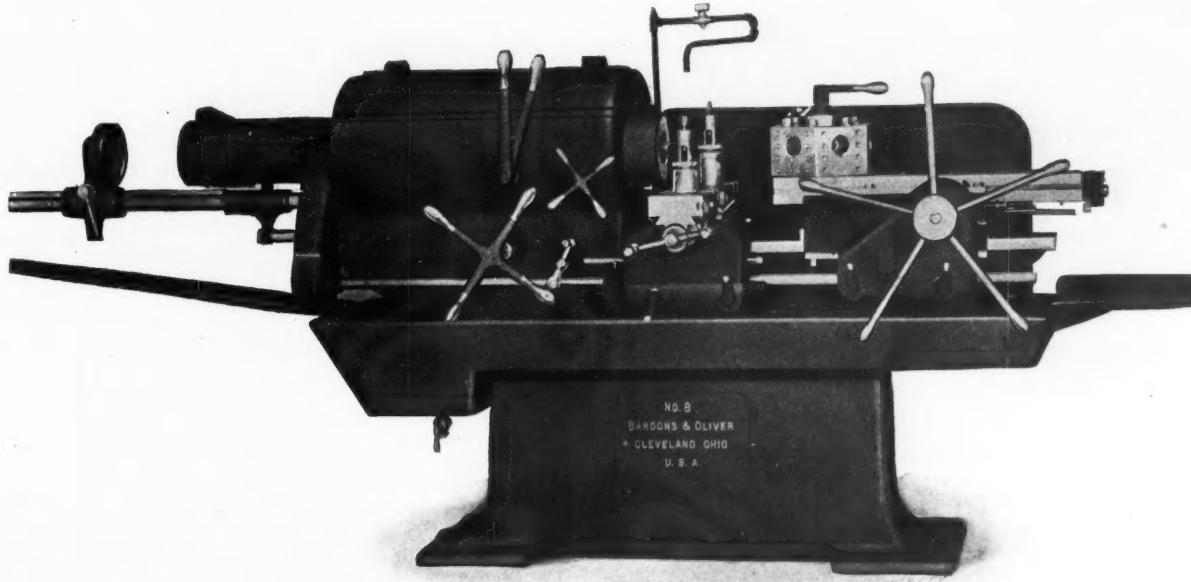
Bardons & Oliver No. 8 Motor-driven Geared-head Lathe
